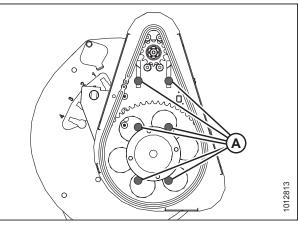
Single-Reel Drive Shown – Double Reel Similar
